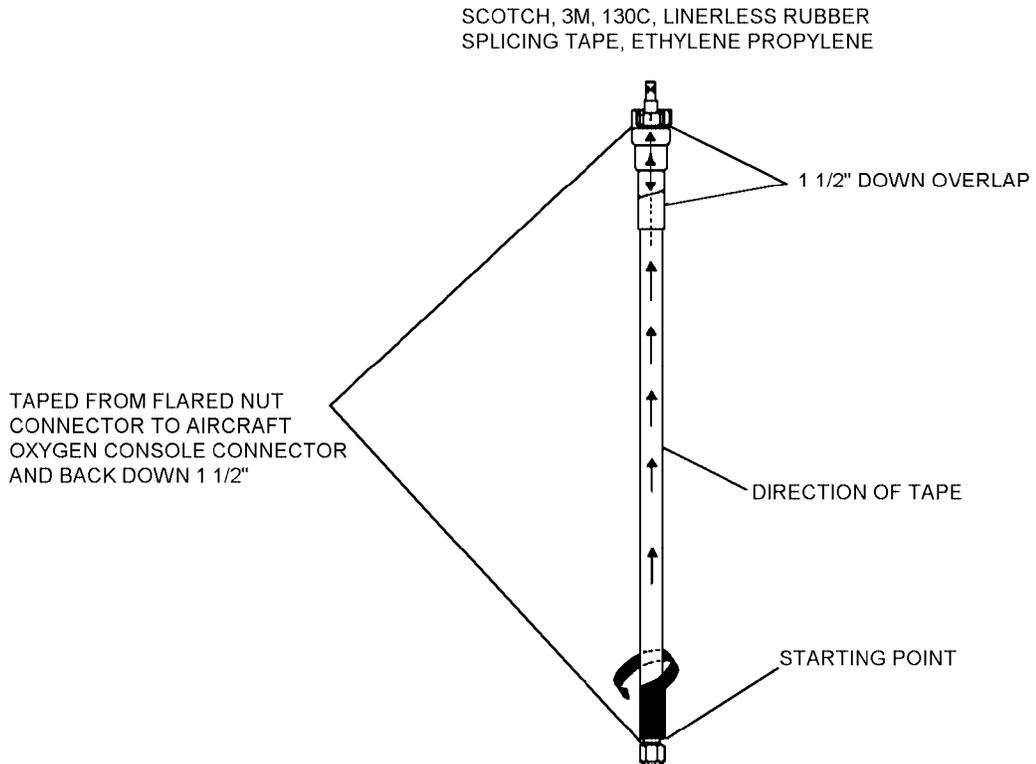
Seat Kit to Aircraft Console Hose Assembly Taping
